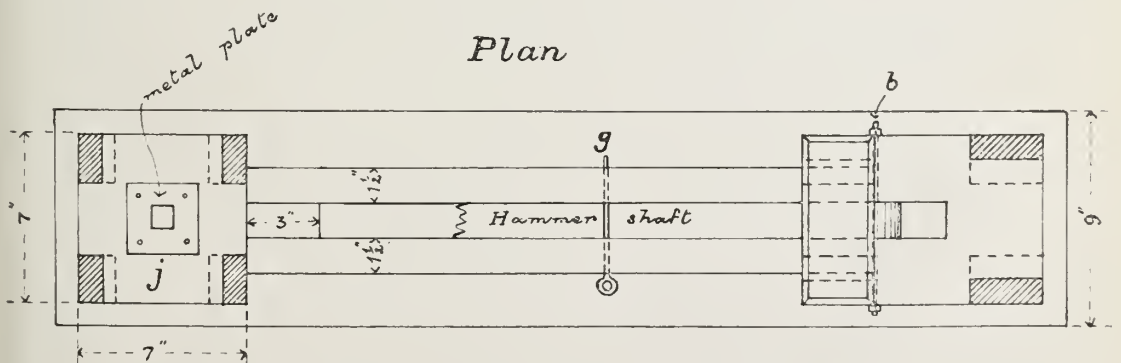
PLATE III.—DIAGRAM OF SPLITTING MACHINE.
